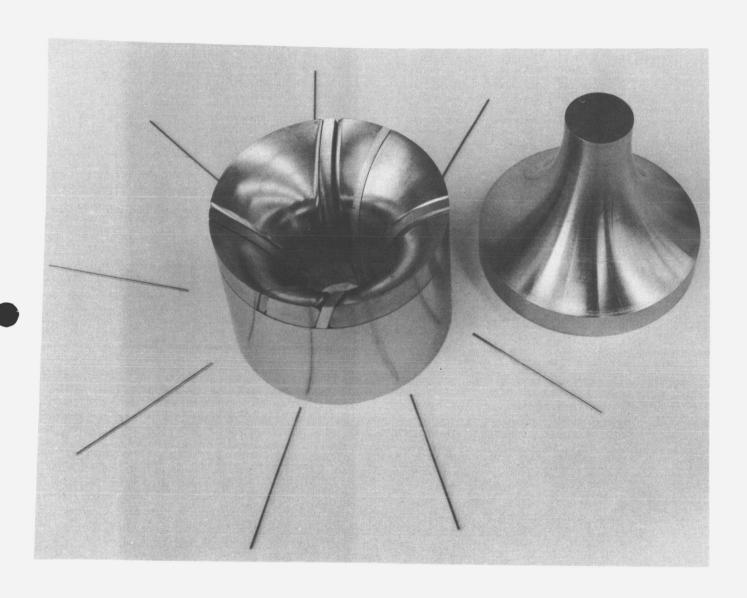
Final Simulated Impeller Sample Showing Partial Lay Up of Pre-Bond Assembly
